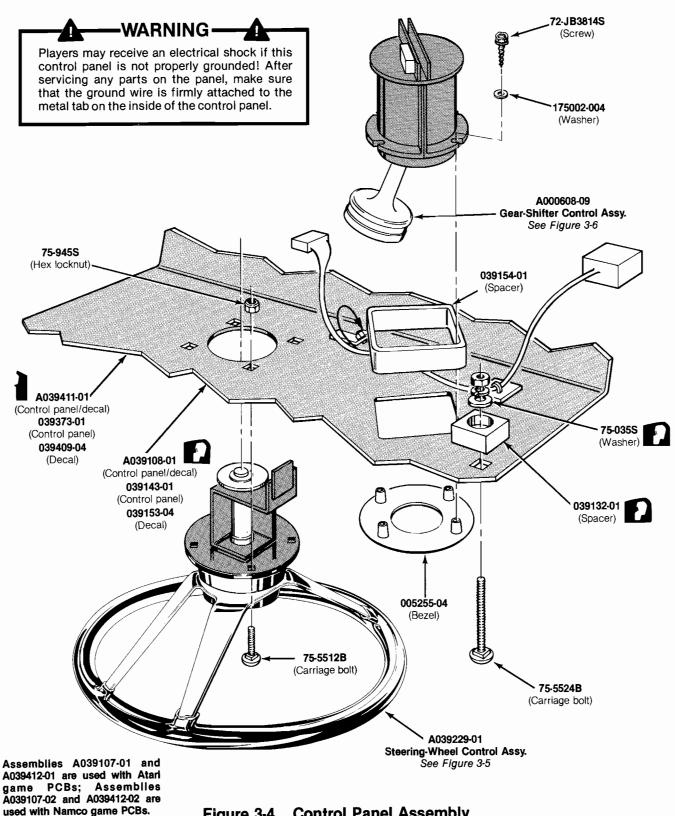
Control Panel Assembly Upright Cabinet A039412-01 & -02 A Sit-Down Cabinet A039107-01 & -02 B
